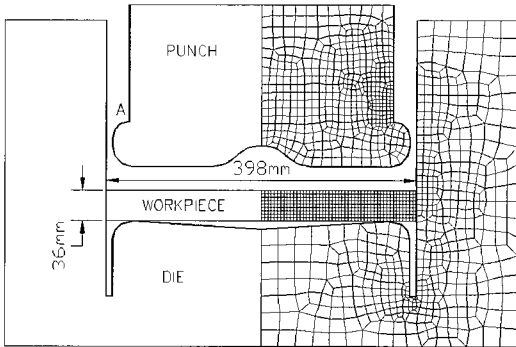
Finite element meshes for workpiece and tools used in the main analysis of 6061 aluminum alloy wheel forging processes
